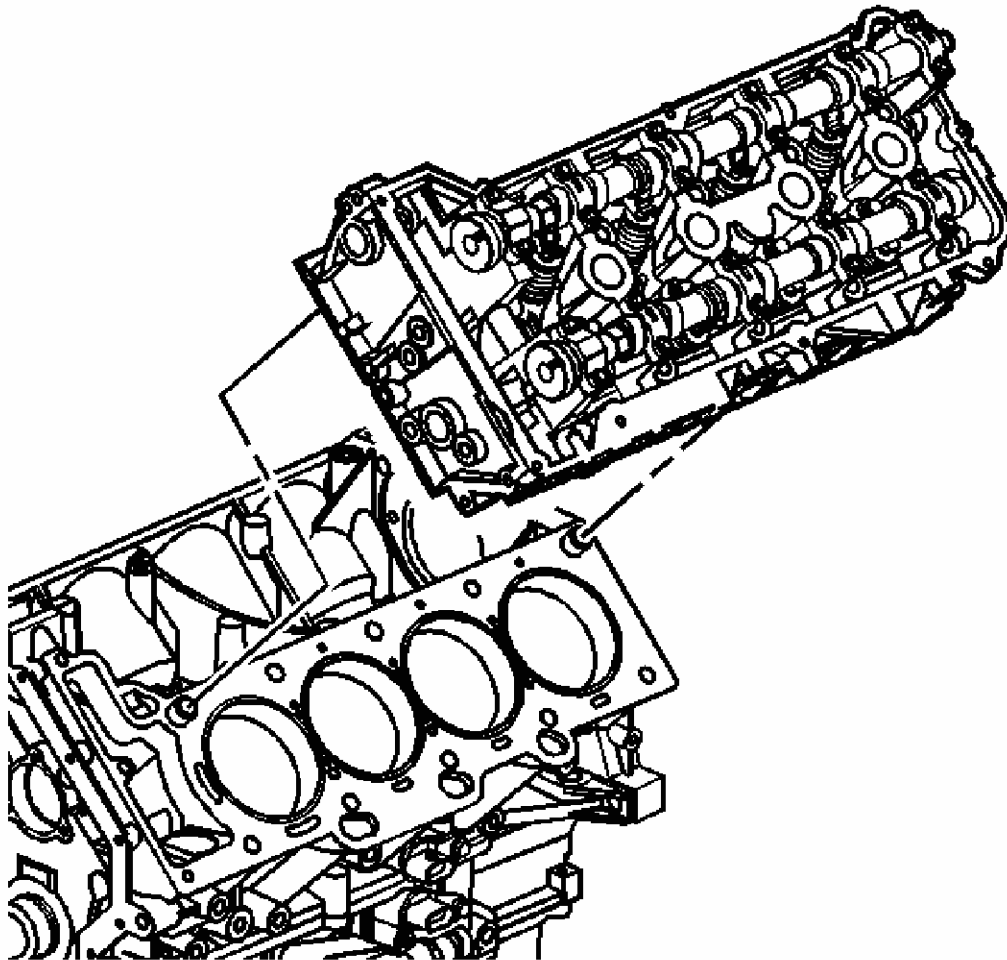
View Of Cylinder Head With Alignment Dowels - Left
